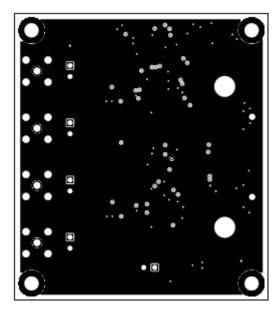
ADS7057EVM PCB Layer 2: GND Plane
